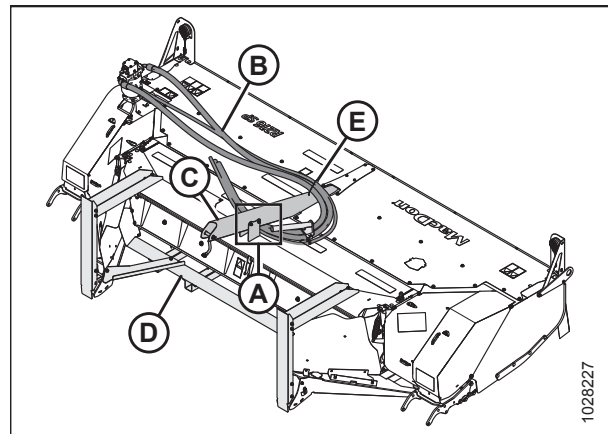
Hydraulic Hose Bundle in Shipping Position
